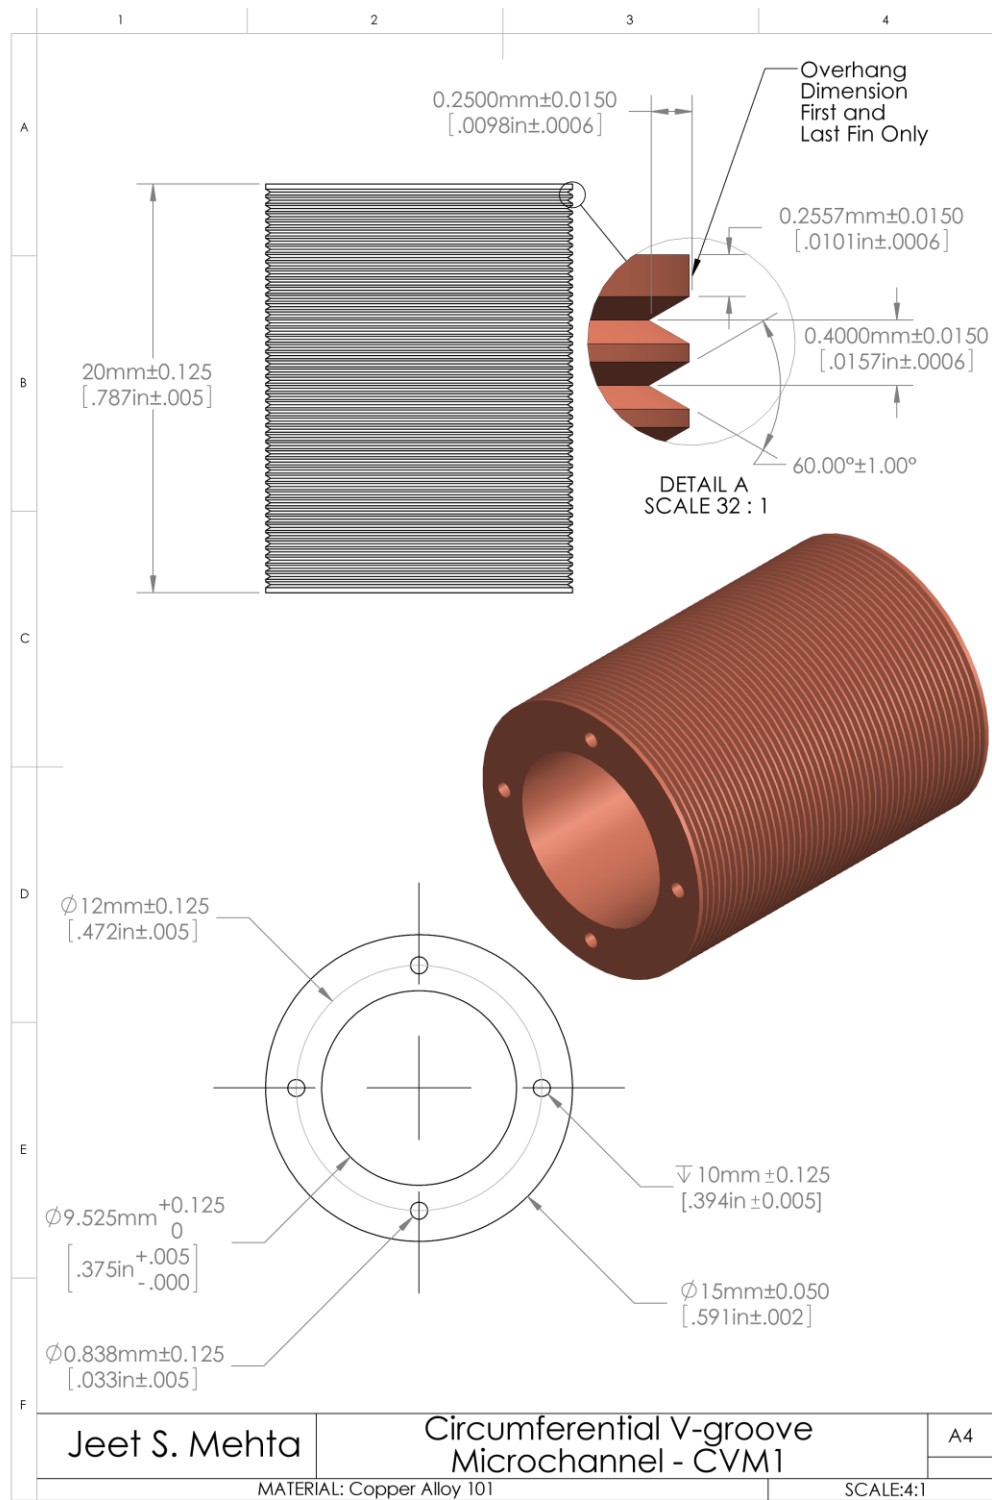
Technical drawing of the circumferential V-groove microchannel – CVM1 test section
